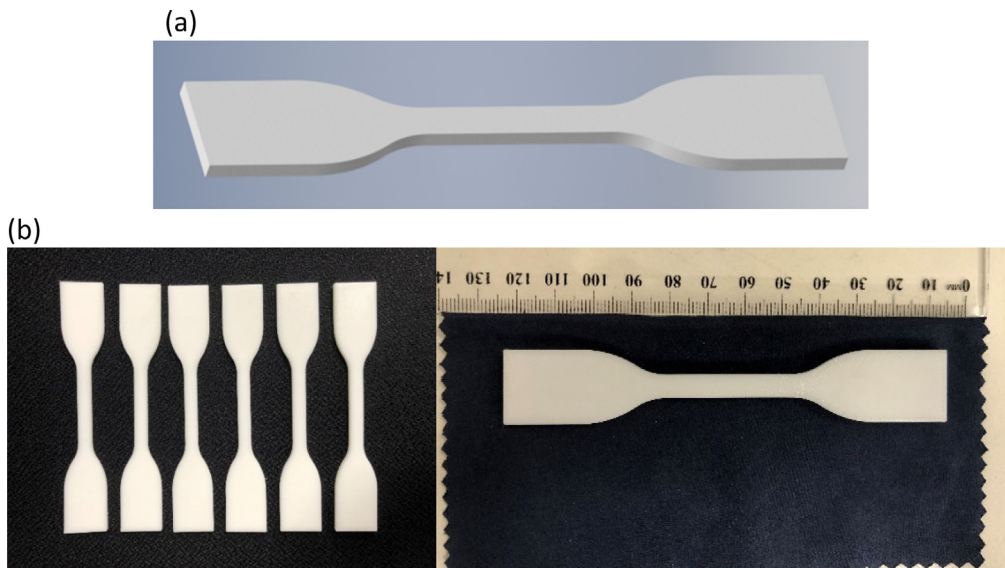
(a) CAD drawing of dumbbell samples and (b) fabricated dumbbell samples.
